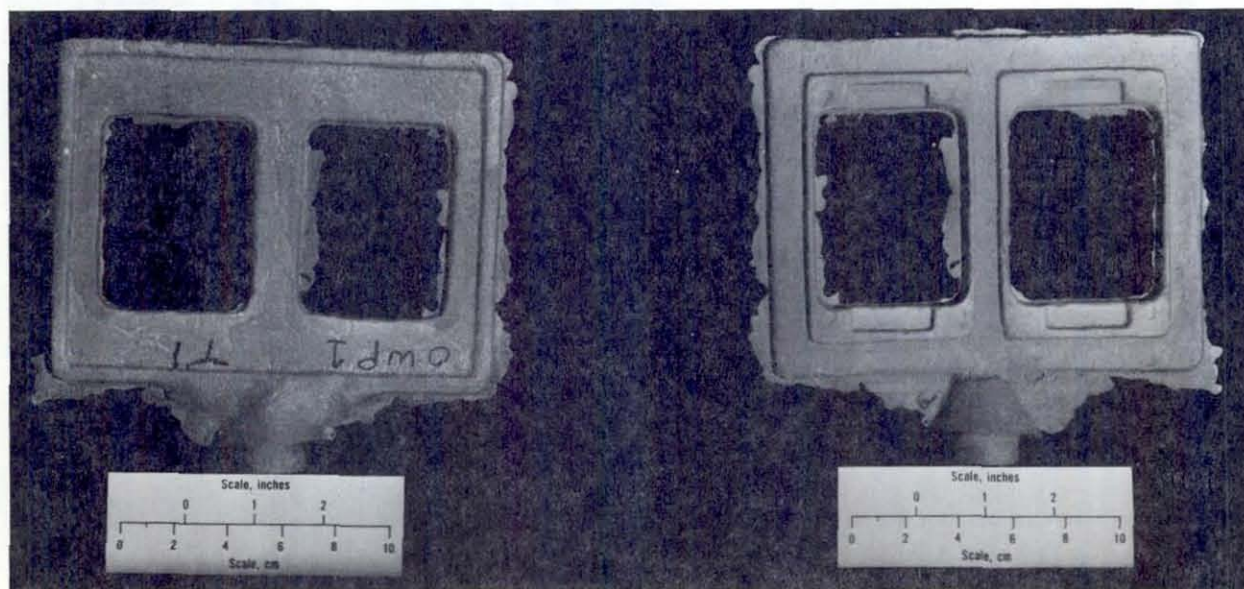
Typical wall plate shell casting from an unwashed waterglass-bonded olivine mold (front and back views).
